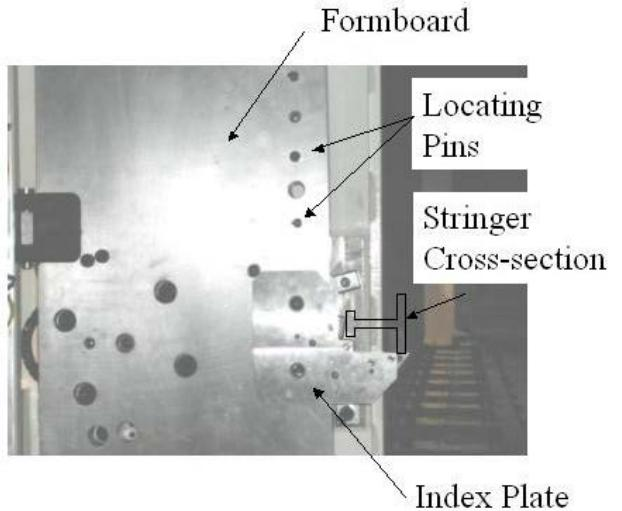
Prototype A380 pegboard ("formboard") and one index-plate
